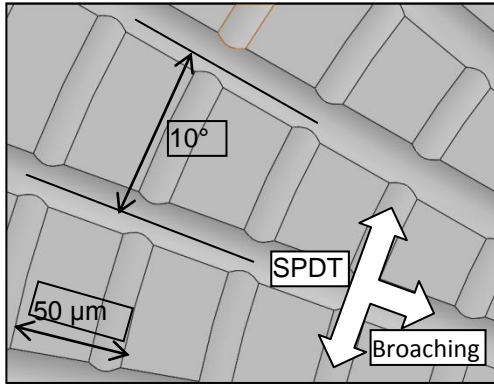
Enlarged top view of process chain model of machining polar microstructure
